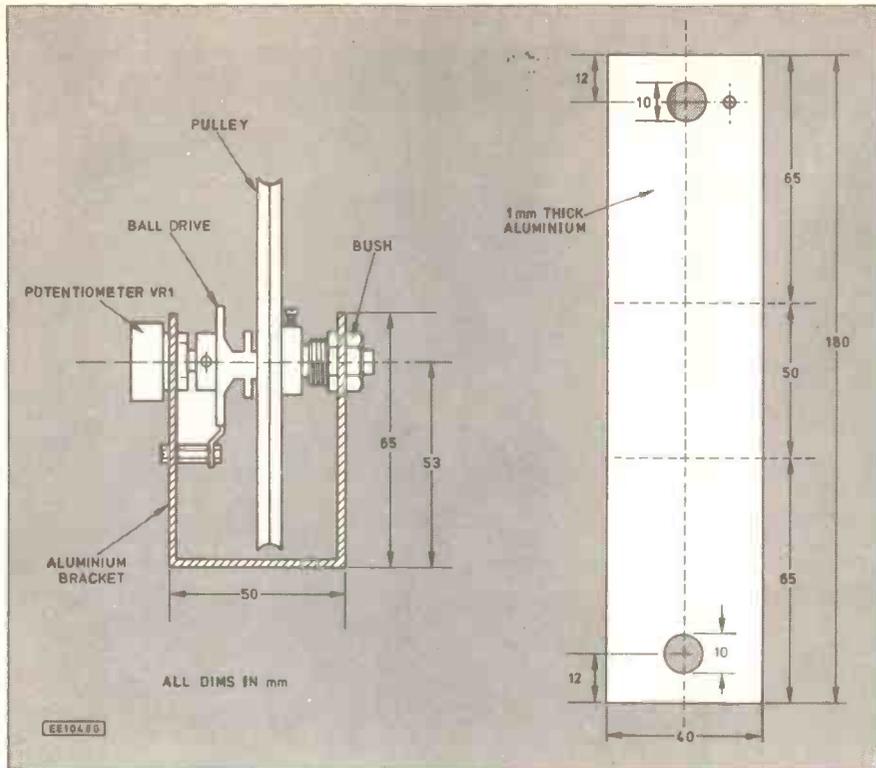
Drilling details for the pulley U-bracket and mechanical arrangement for the Tank Sensor unit.
